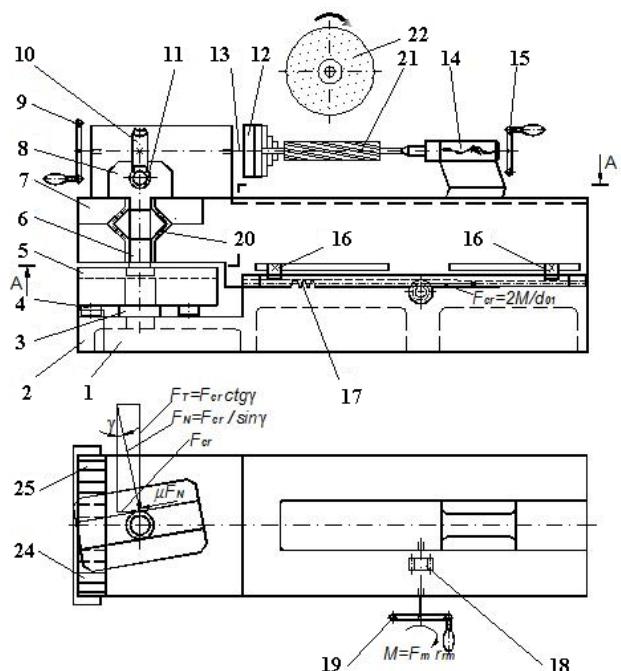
Grinding device manufactured at Cugir M.P.
